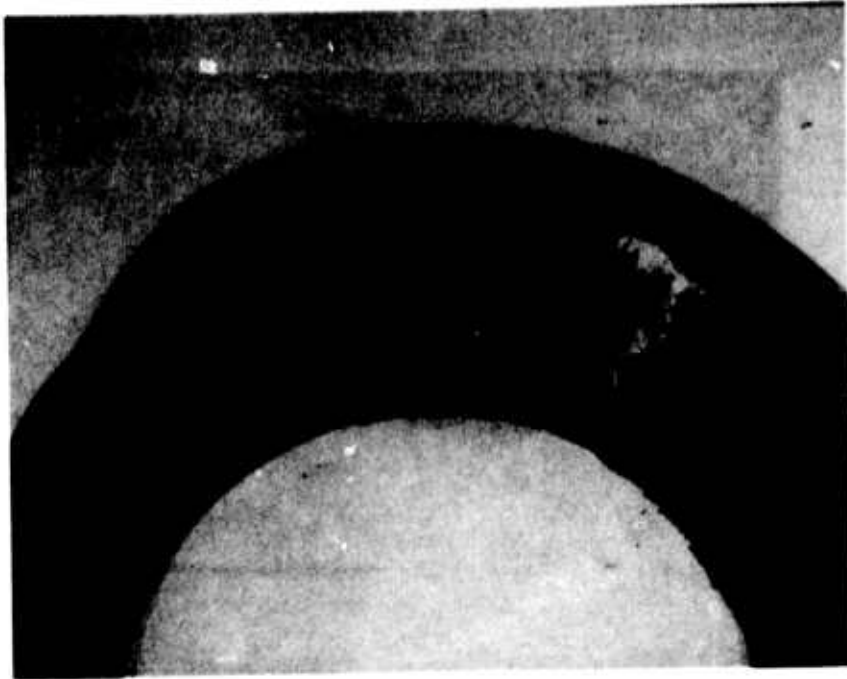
Crack - Roller/Gear Interface, First-Row Pinion.
